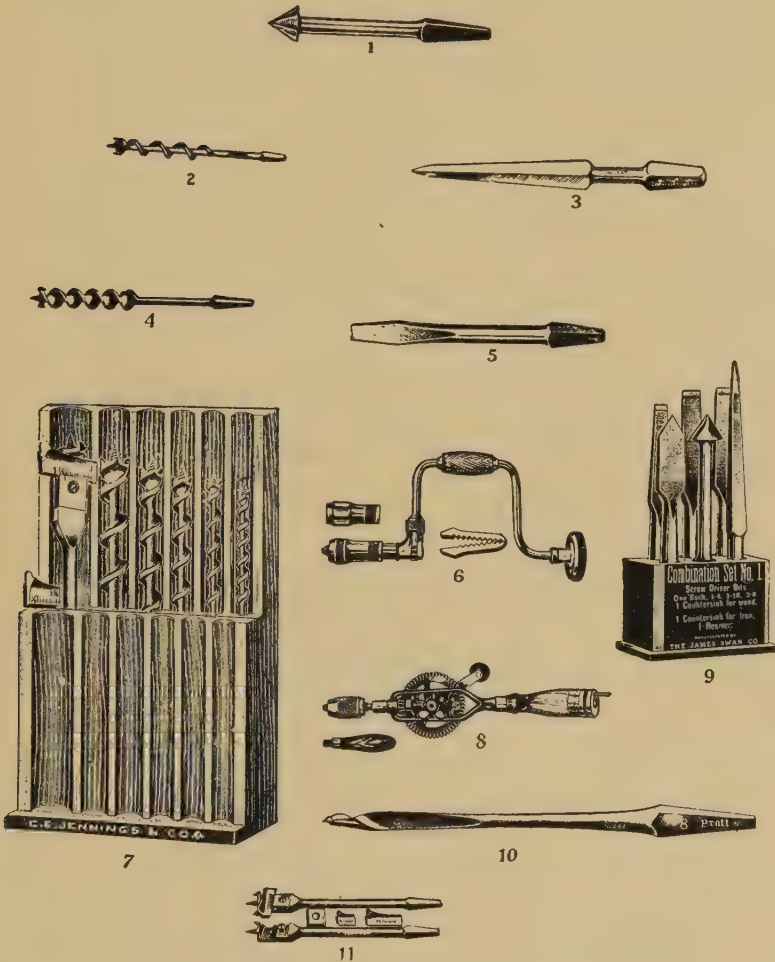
BORING, DRILLING, AND REAMING TOOLS
